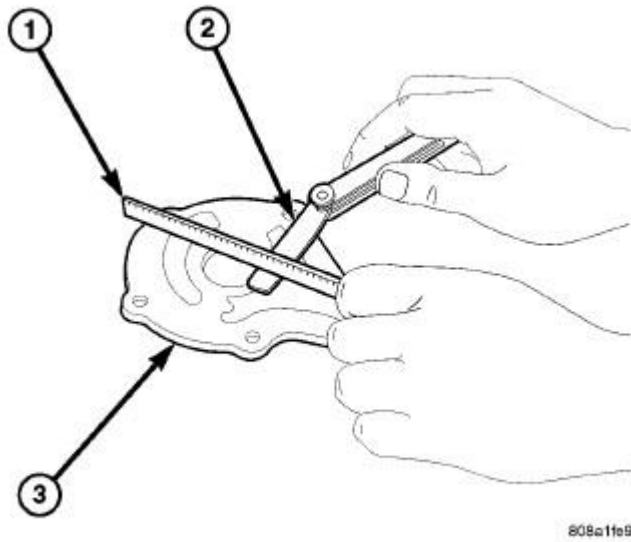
CHECKING OIL PUMP COVER FLATNESS - TYPICAL
